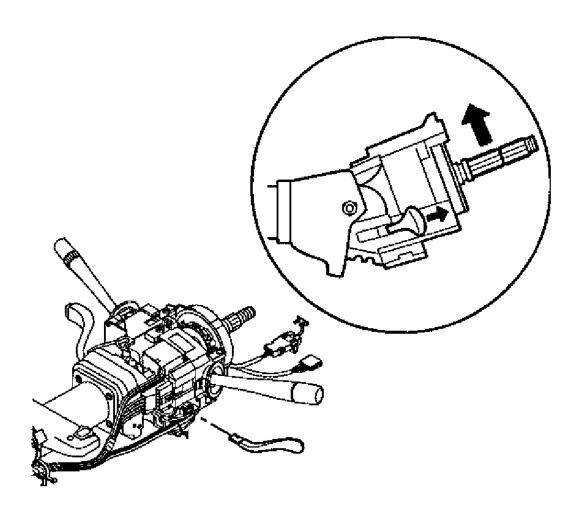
Tilting Column To Up Position Courtesy of GENERAL MOTORS CORP.
